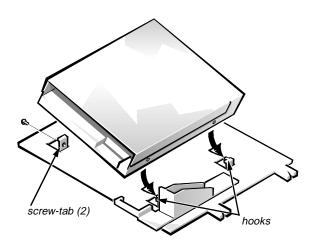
Installing a Drive on the 3.5-Inch Bracket
